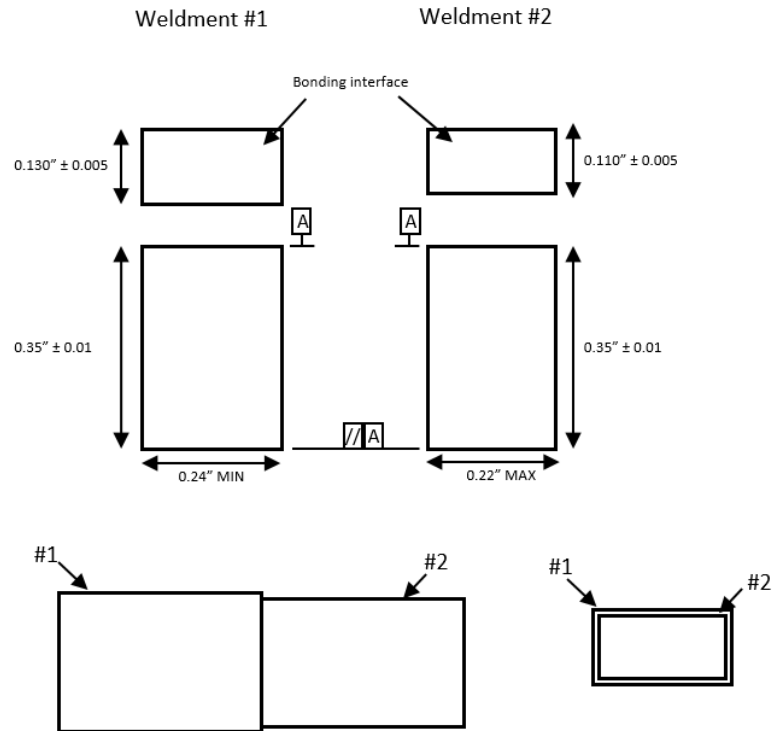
Coupon dimensions for PRW weldment.
